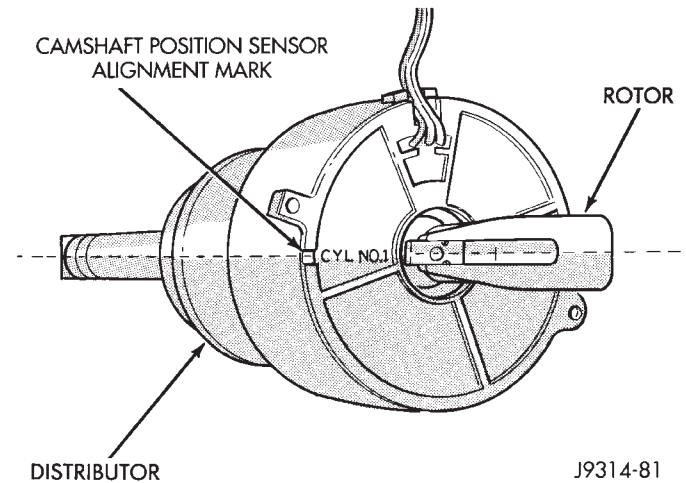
Rotor Alignment Mark—5.2L/5.9LEngines
